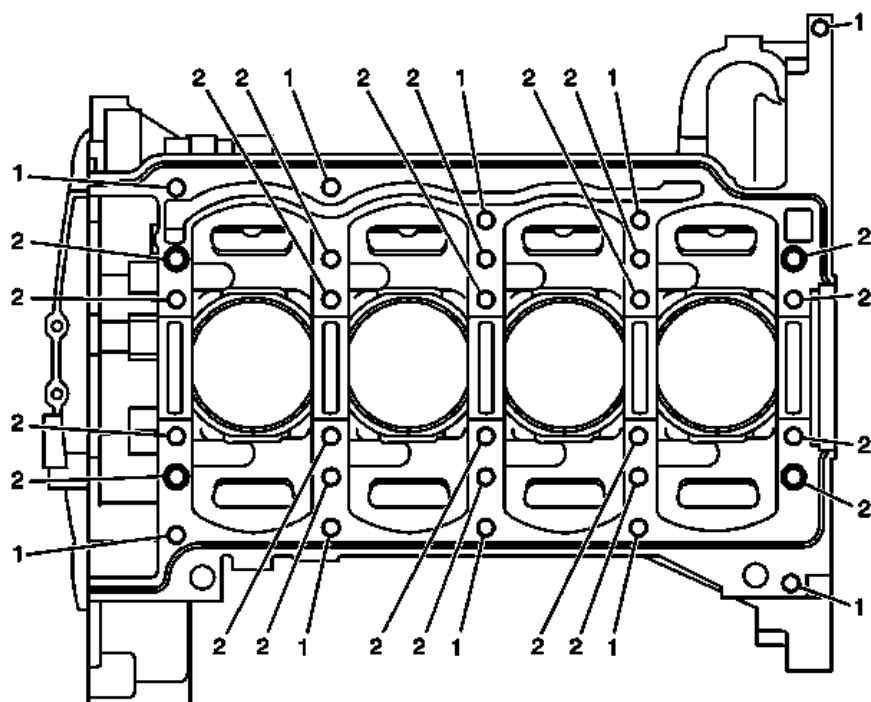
Identifying Bolt Size & Locations On Engine Block - Bottom
